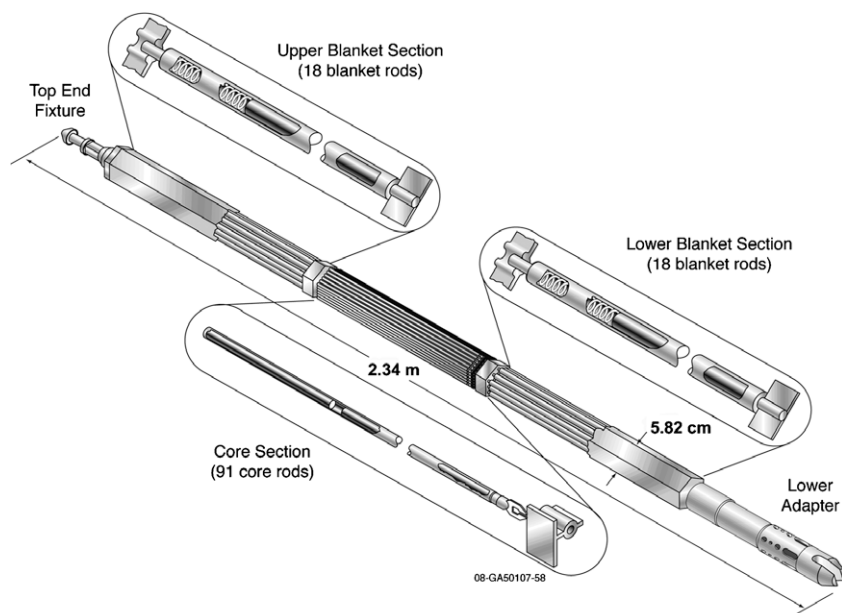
EBR-II Core I driver fuel assembly schematic (early driver fuel assembly design).
